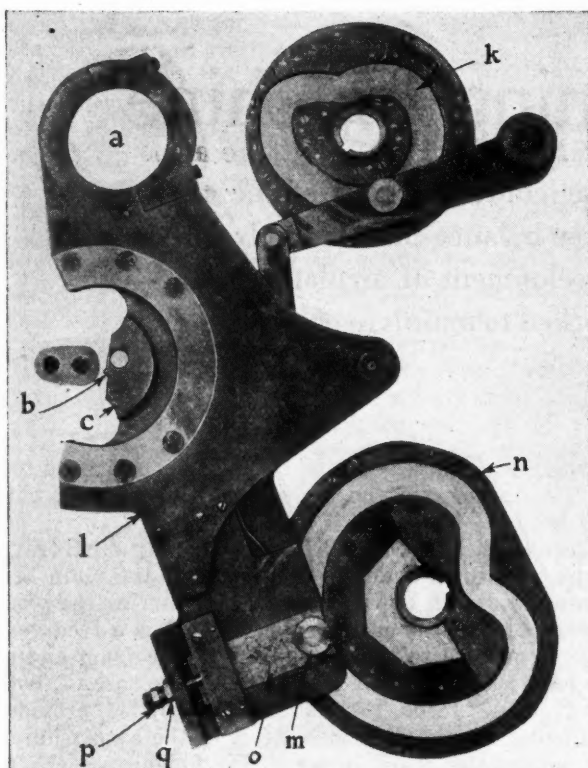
(on left)—Rocker arms, tool block, cutting tool, upper and lower master camshafts, gear sector and levers. Fig. 4 (above)—Showing mechanism for tilting tool so as to maintain the same angularity relative to the surface being cut
